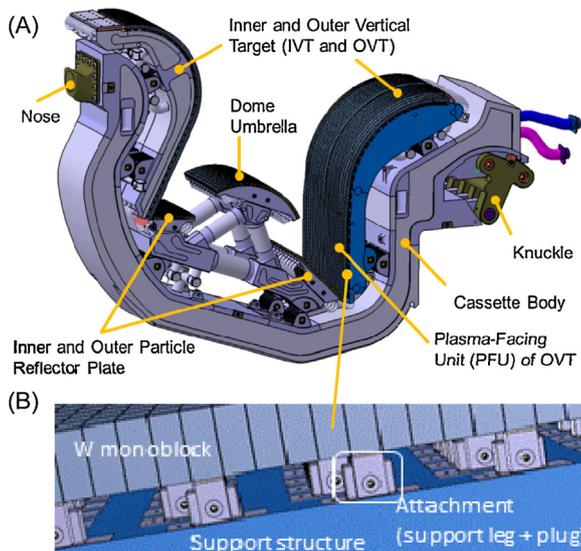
Schematic drawing of full-scale W-PFU prototype.
